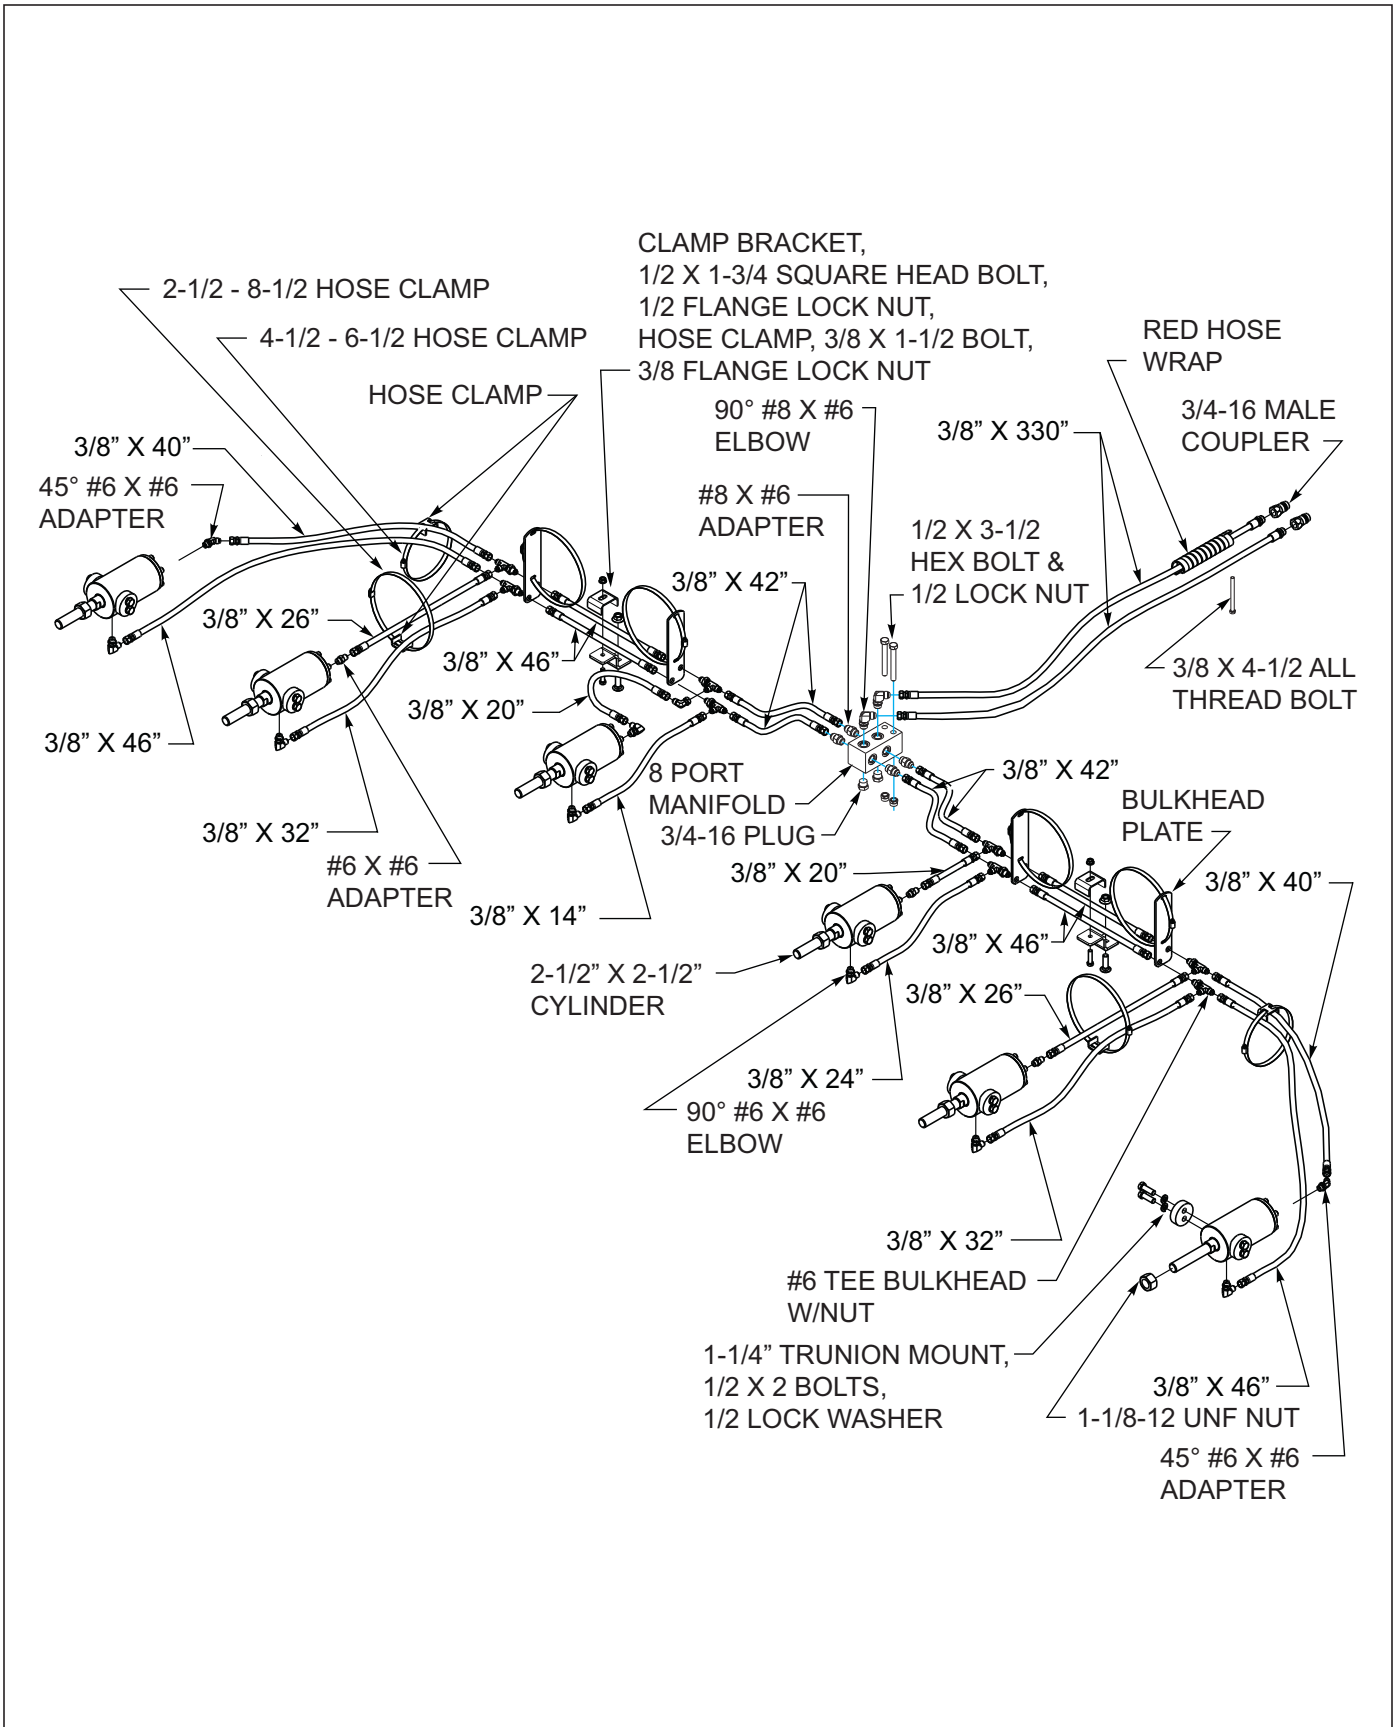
Hydraulic Reel Hose Clamp Installation
